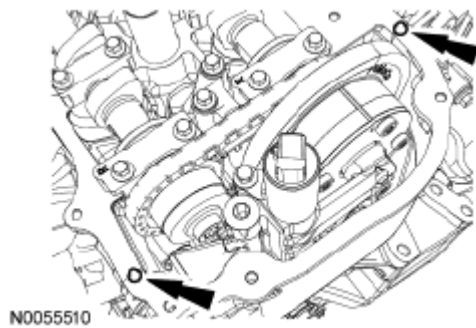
Locating Engine Front Cover-To-RH Cylinder Head Joints
